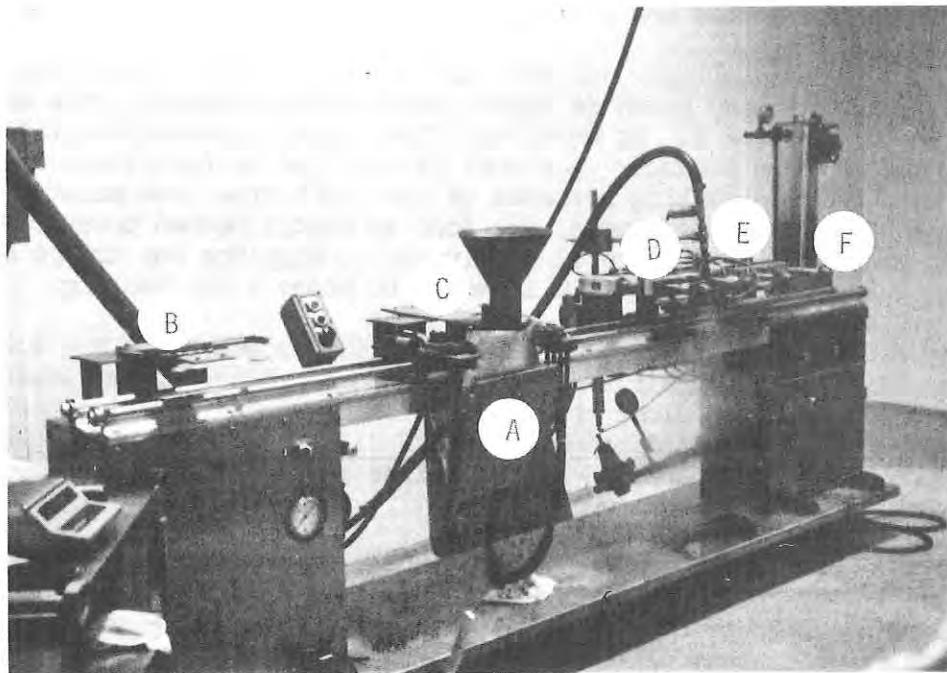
Prototype Model Fill/Seal Machine. The picture depicts the pouch in a special jig at Stage 2, ready for filling via the funnel. Other areas identified on the picture are as follows: A. Specially developed jig to support the pouch; B. Stage 1, Pouch loading; C. Stage 2, Pouch filling zone; D. Stage 3, Pouch sealing zone with two hot horizontal bars and steam flushing outlet; E. Stage 4, Pouch seal cooling bars; F. Stage 5, Pouch removal zone.
